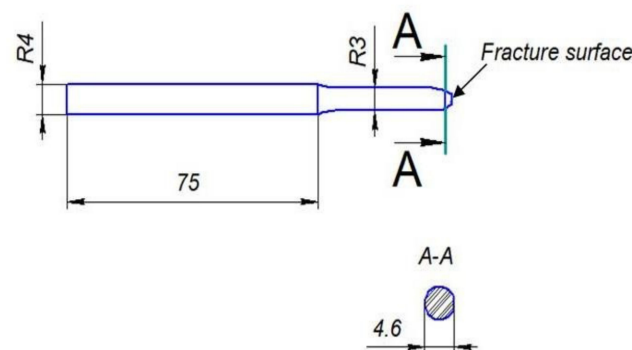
Scheme of sample cutting for the preparation of a thin section of the sample after fracturing for use in microscopic studies. This figure shows the example after the uniaxial tensile test. For torsion, the cutting method is similar (all dimensions are in mm).
